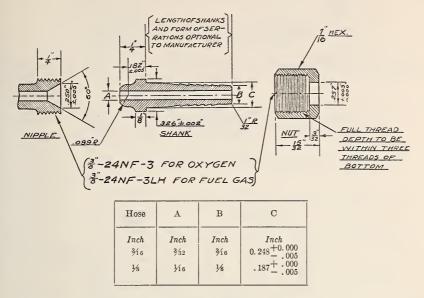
"A" size of standard hose connections for welding and cutting torches.
